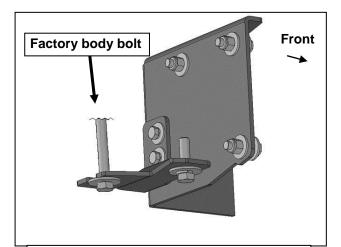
Attach passenger/right Frame Bracket to end of frame
